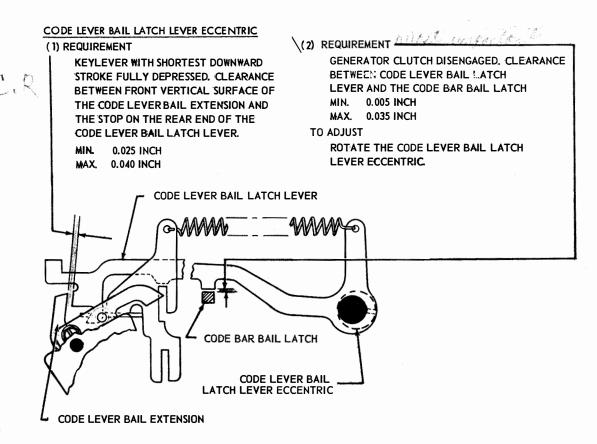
KEYBOARD CODE LEVER BAIL LATCH MECHANISM, LEFT SIDE VIEW
